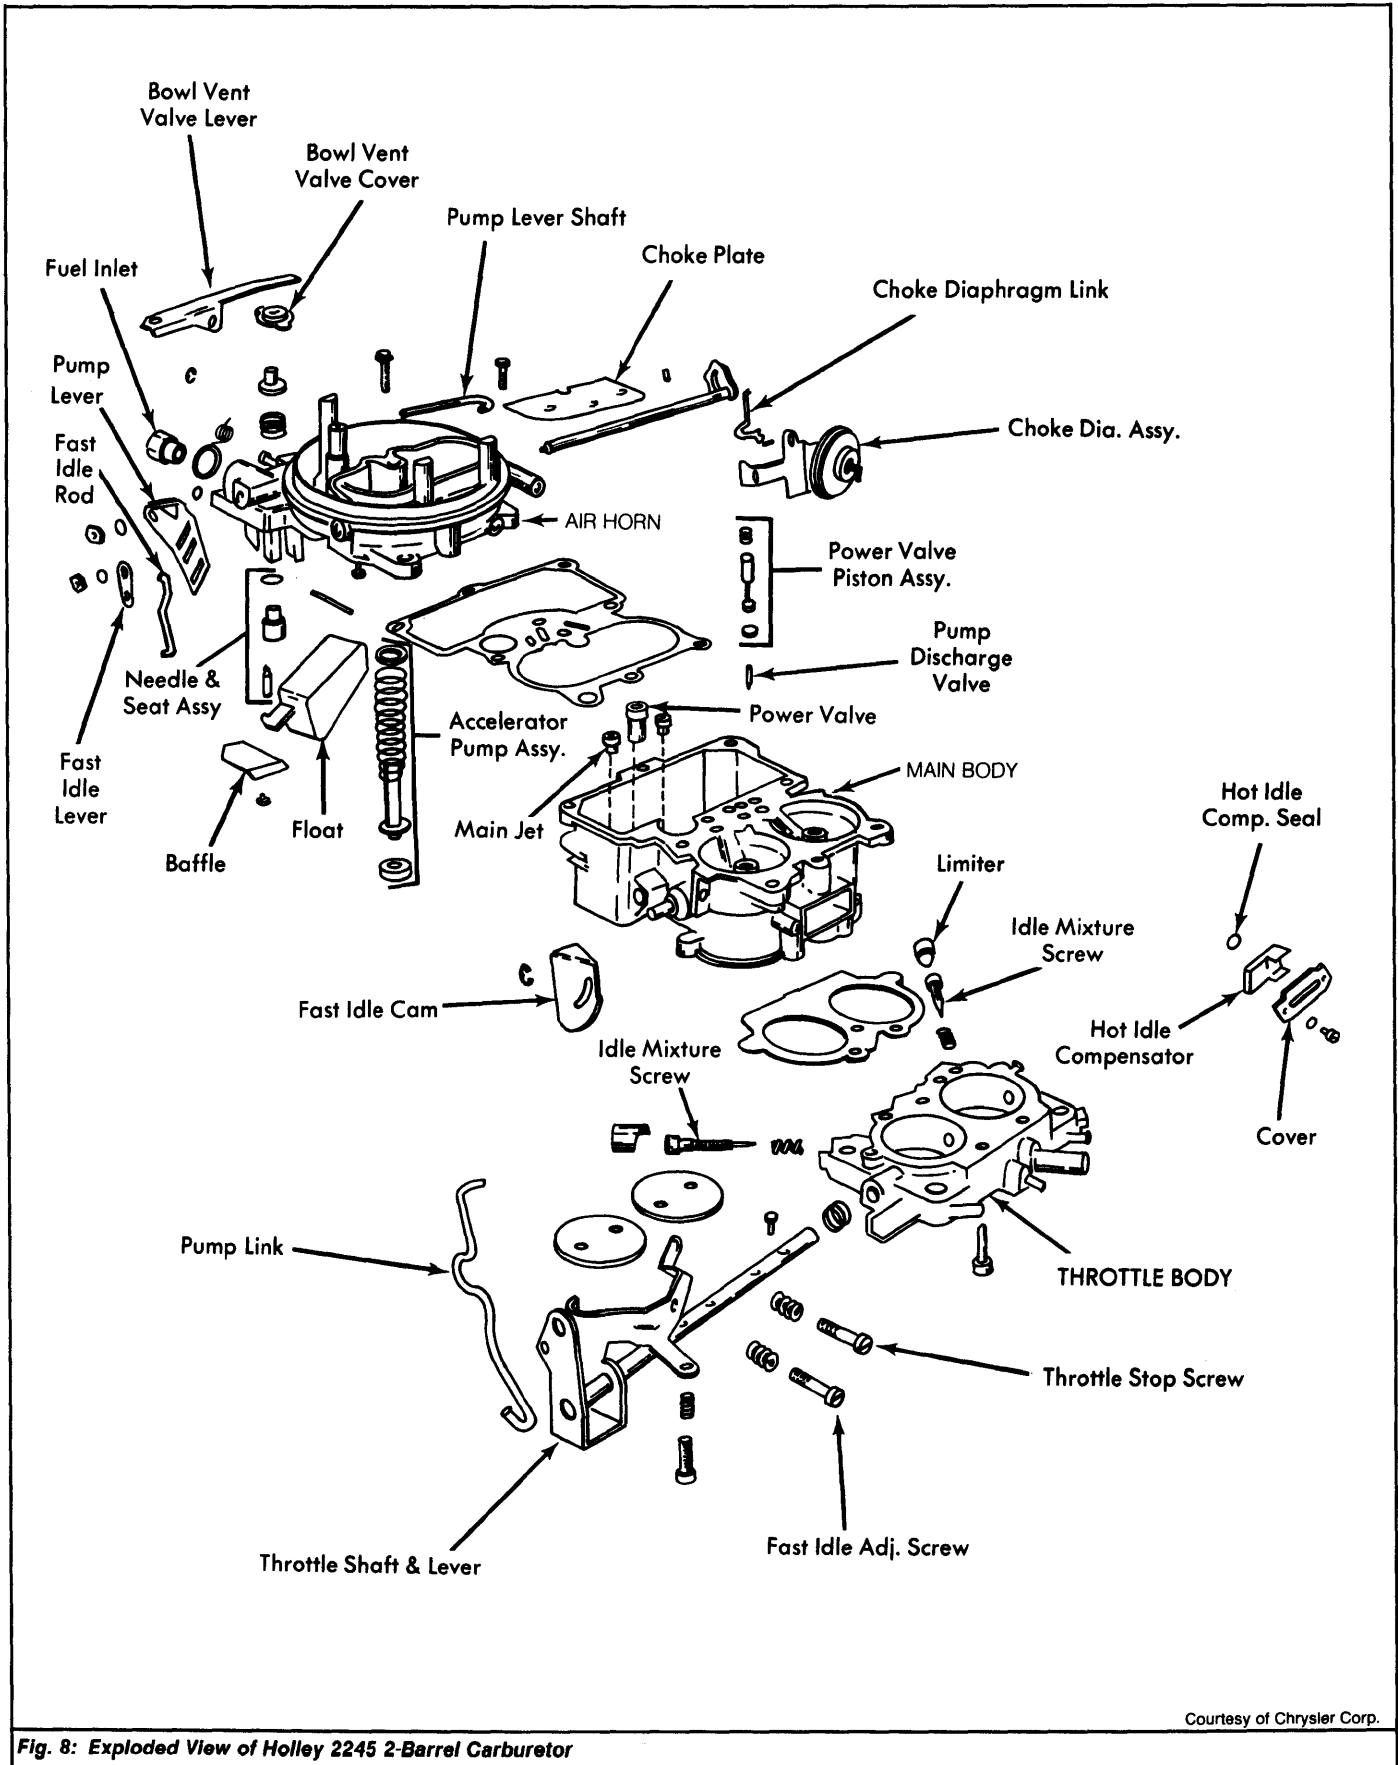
Exploded View of Holley 2245 2-Barrel Carburetor
